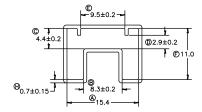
Tape and Reel Packing Option 7 (750 parts per reel)
